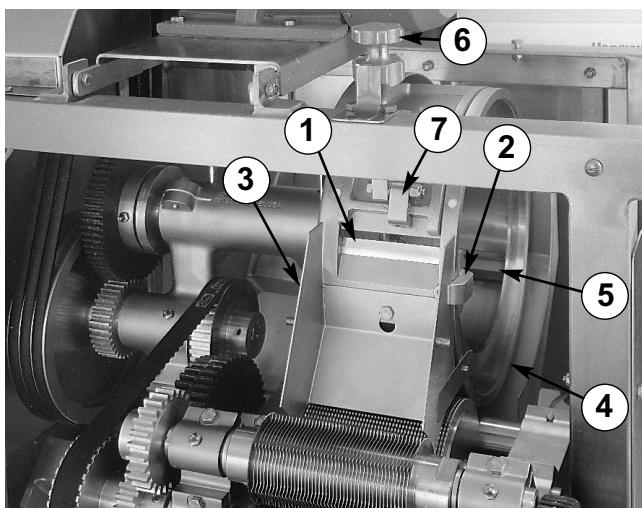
Slicing Unit. (1) Slicing Knife, (2) Slicing Knife Clamp, (3) Slice Guide, (4) Slicing Case, (5) Impeller, (6) Slice Adjustment Knob, (7) Gate Bracket.
